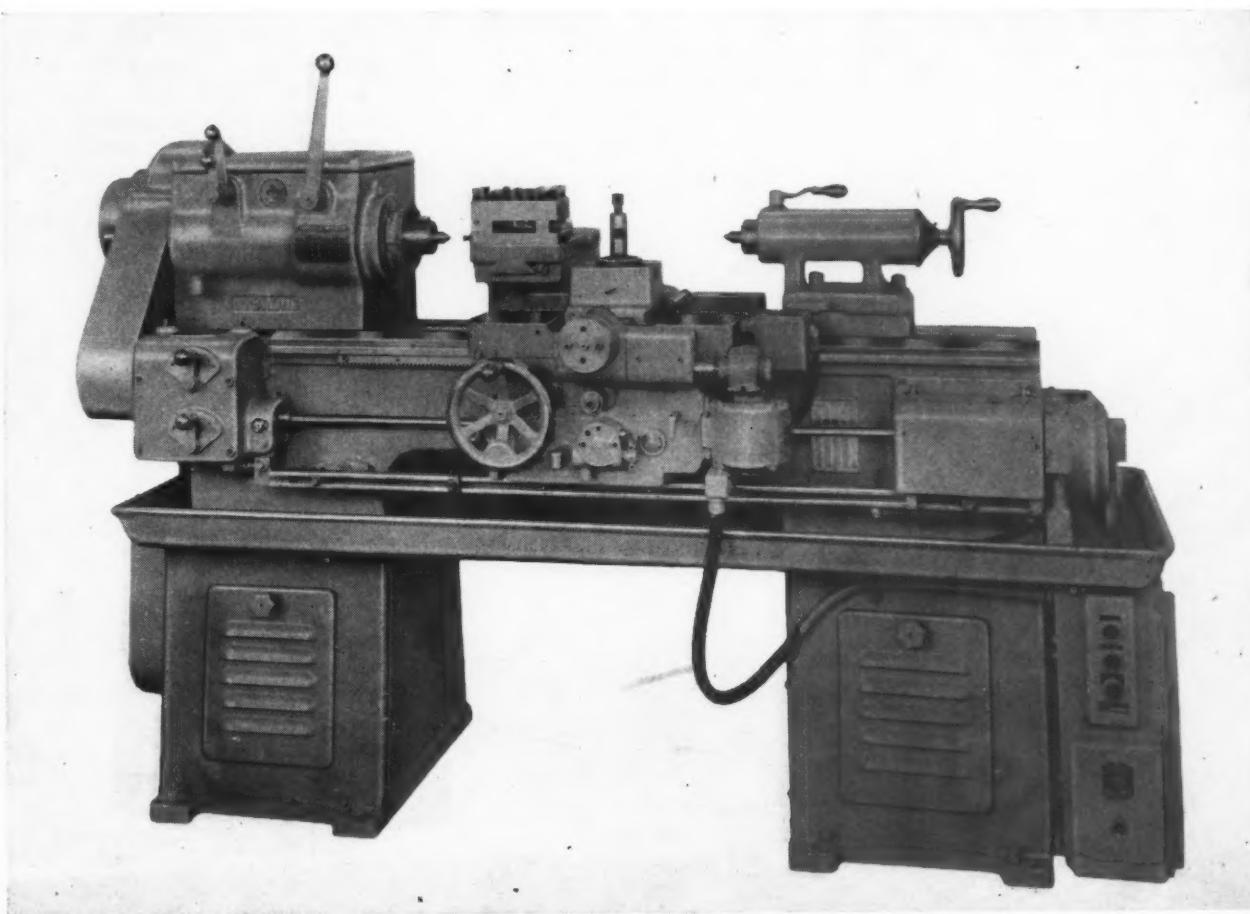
New LeBlond "Clipper" automatic high-speed manufacturing lathe equipped with normal-speed geared headstock—one of three headstocks available with this machine
